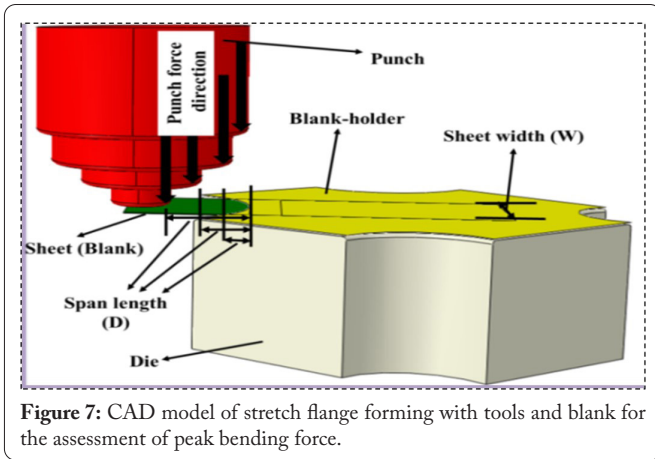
CAD model of stretch flange forming with tools and blank for the assessment of peak bending force.
